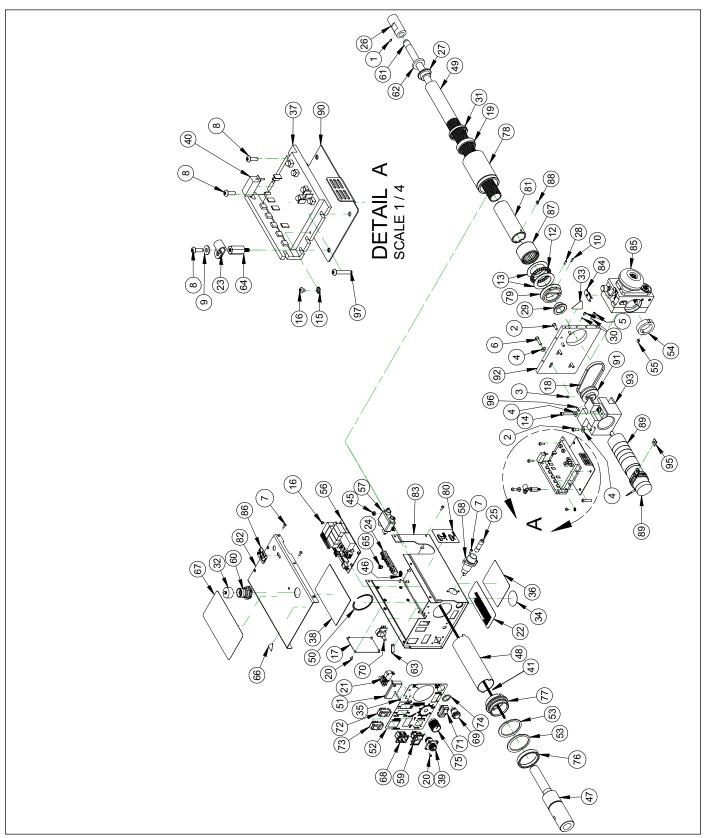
WELD HEAD ASSEMBLY (P/N 106402)
